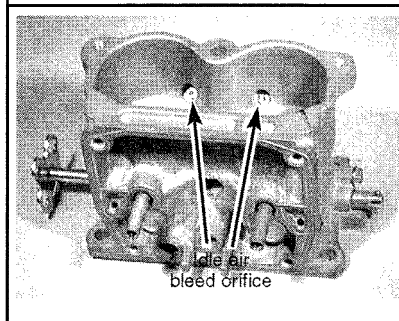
Remove the 2 idle air bleed orifices from the carburetor throat
